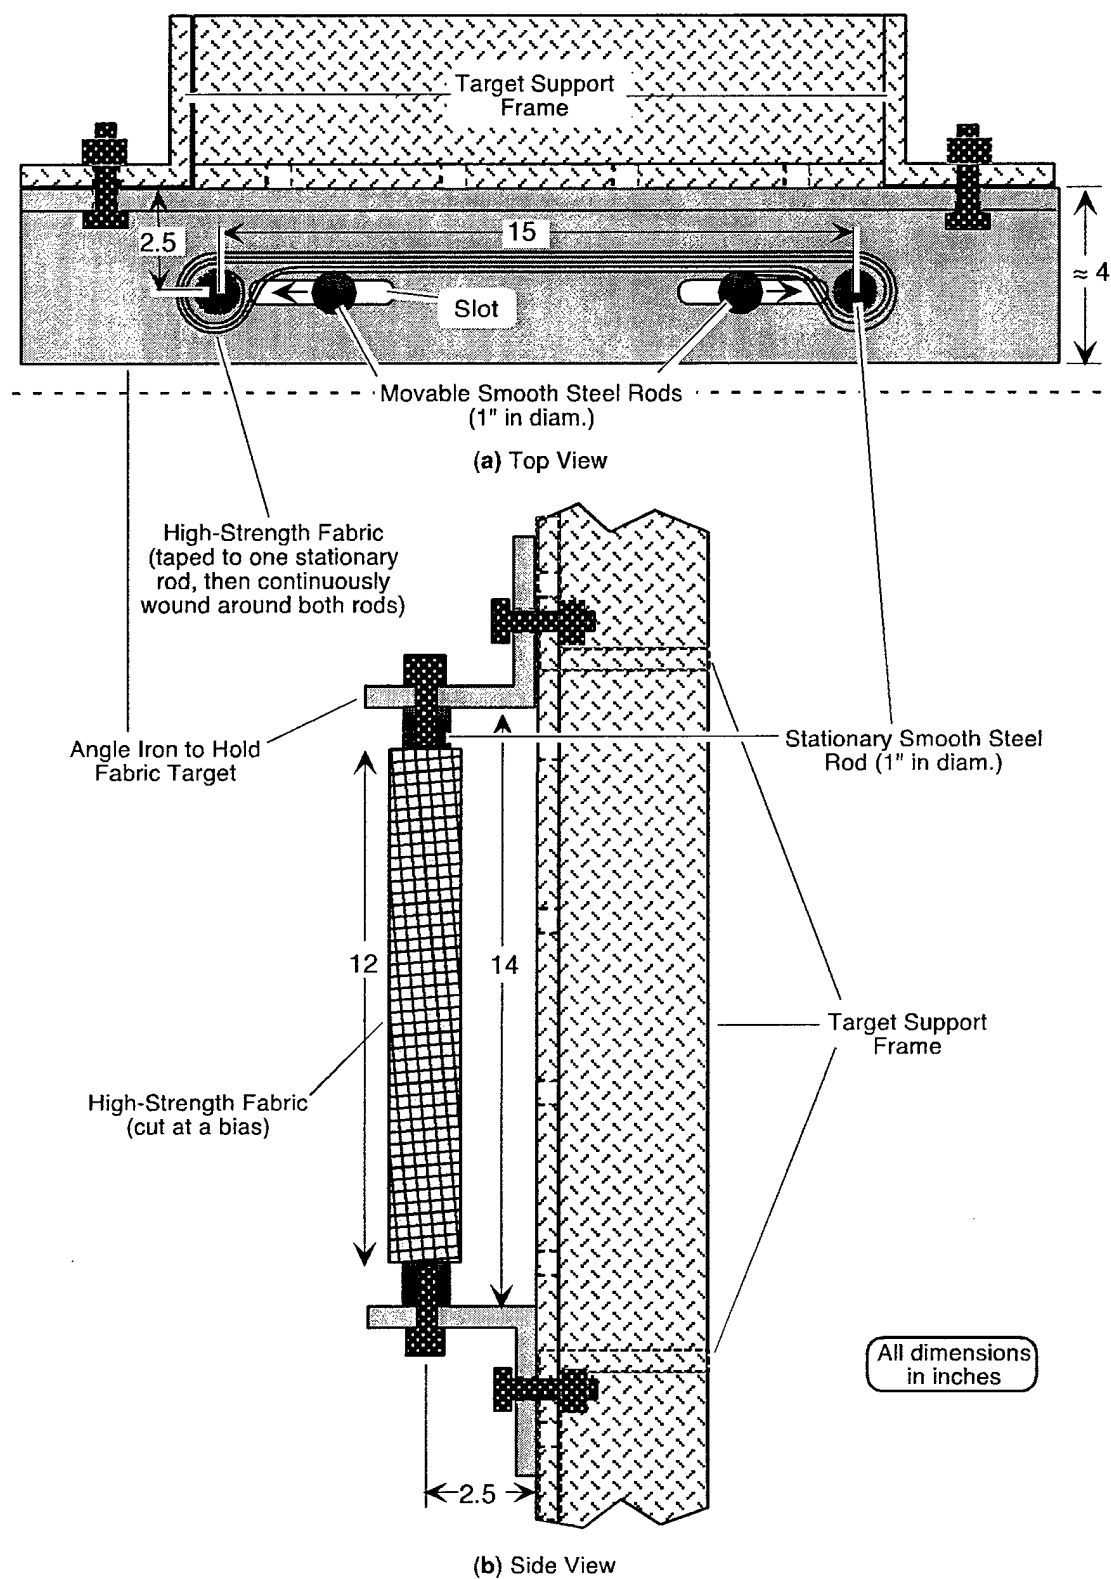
DETAILS OF TARGET CLAMPING APPARATUS FOR CHINA LAKE TEST
